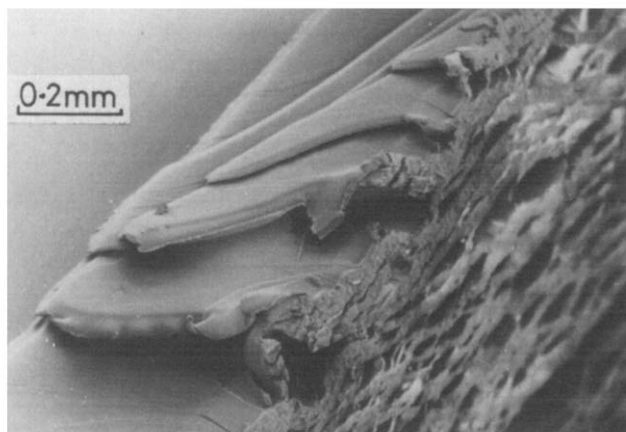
Part of the intersection of the fracture surface and upper moulded face of a PC specimen weathered for 2 years then tested in uniaxial tension. The fracture path follows cracks which have developed from the surface
